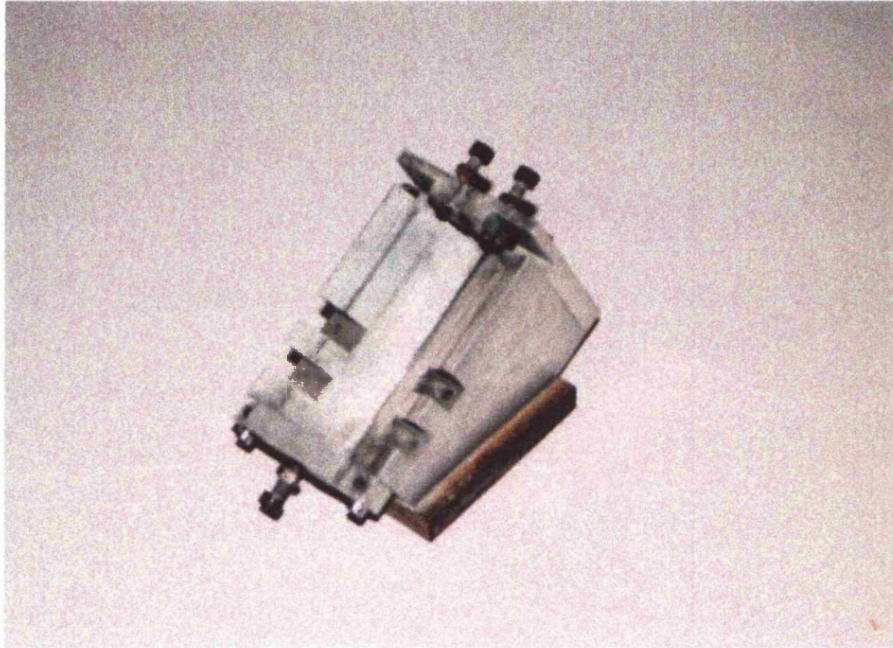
The aluminium jig used to ensure that a correctly angled slot is cut in each sample.
